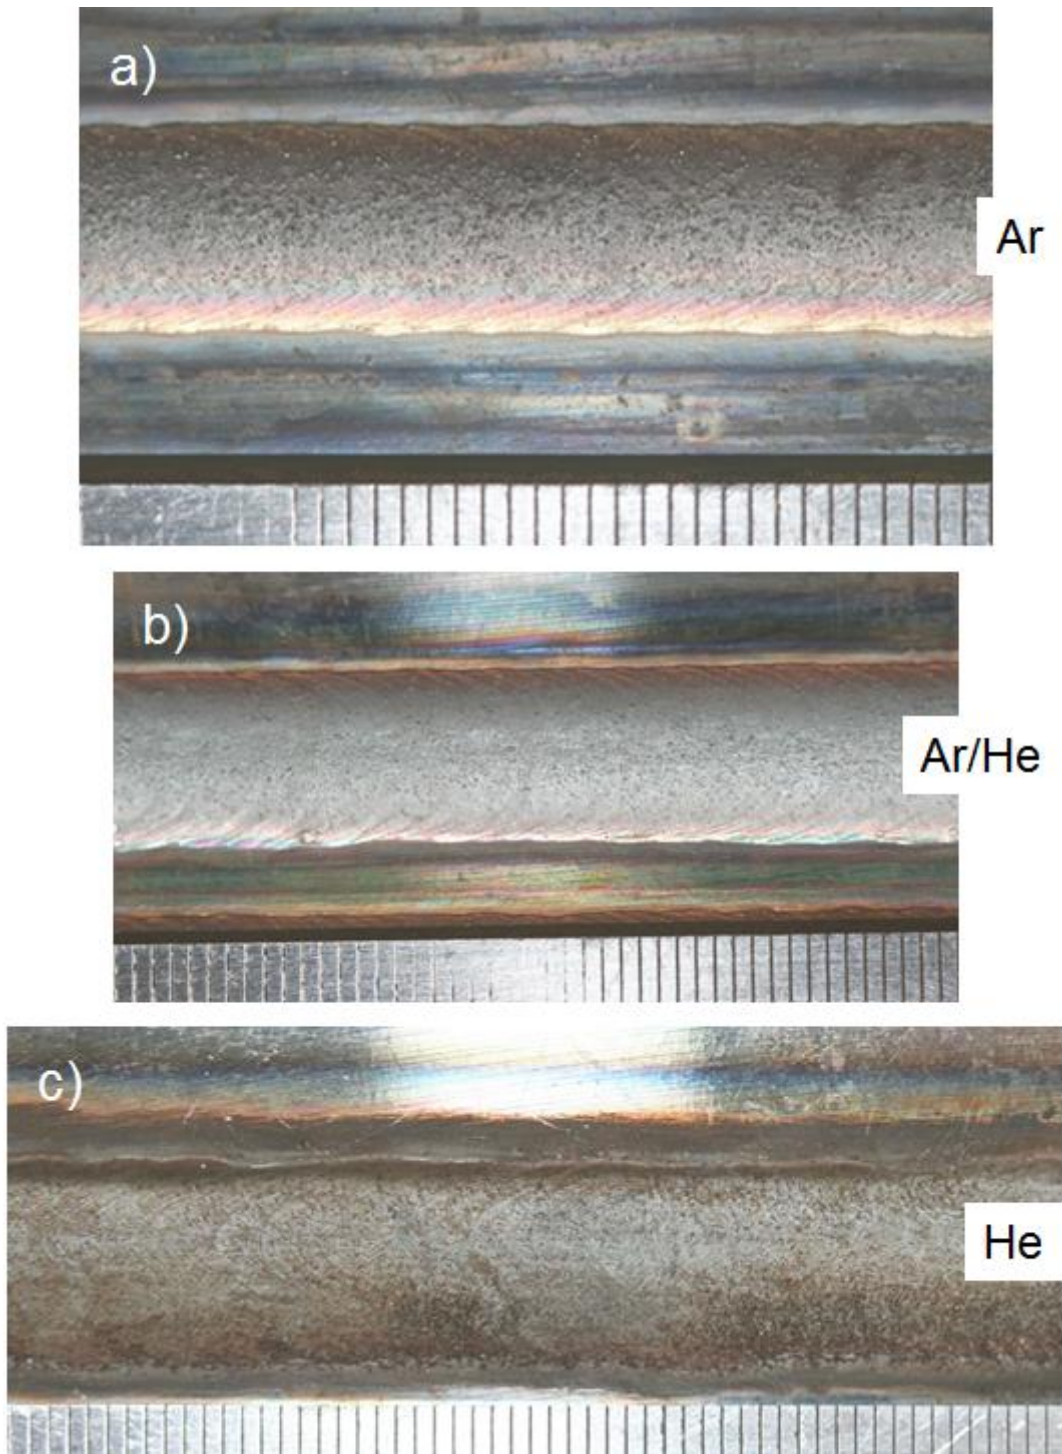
Surface of single bead welding seams in bead-on-plate mode with 15 g/min WC powder feeding rate and a constant electrode angle of $\gamma = 34^\circ$, ruler scale: 1 mm distances, microsections in figure 6-6; shielding gases: a): 100 % Ar; b) 50/50 Ar/He; c) 100 % He
